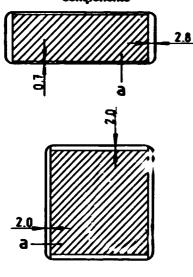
Furniture and joinery profiles machined by a four-side moulder
